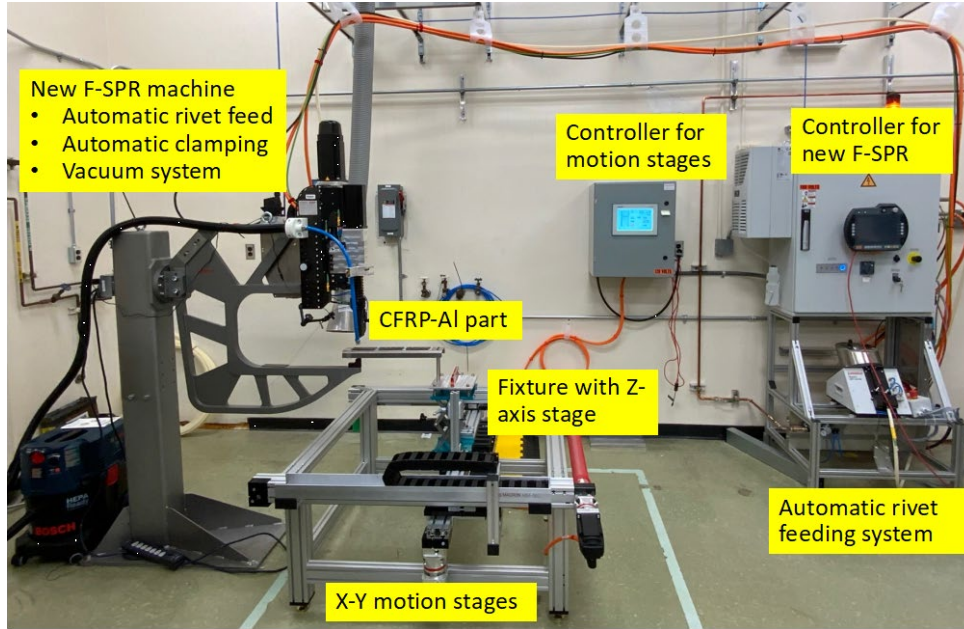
A new integrated welding system includes C-frame welding head, multi-axis motion stages, and fixture for scale-up part-level joining with multiple joints. Source: ORNL.
